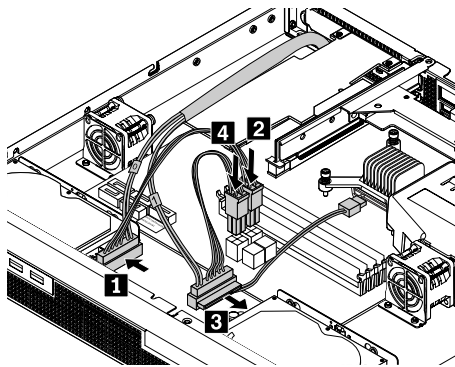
Connecting the mini-SAS to 3.5-inch SAS combo cable to the hard disk drives
